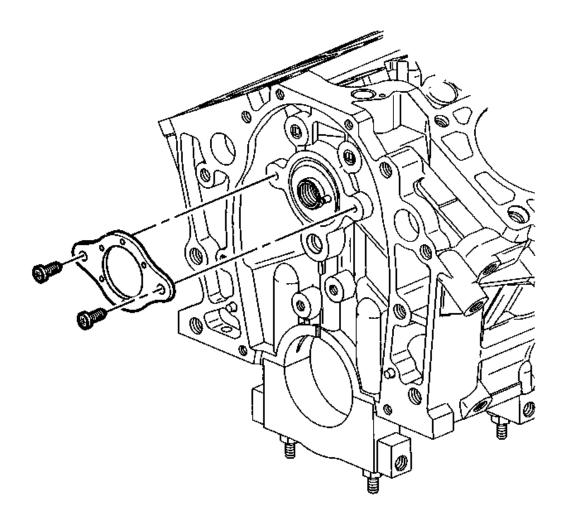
View Of Camshaft Thrust Plate Courtesy of GENERAL MOTORS CORP.
